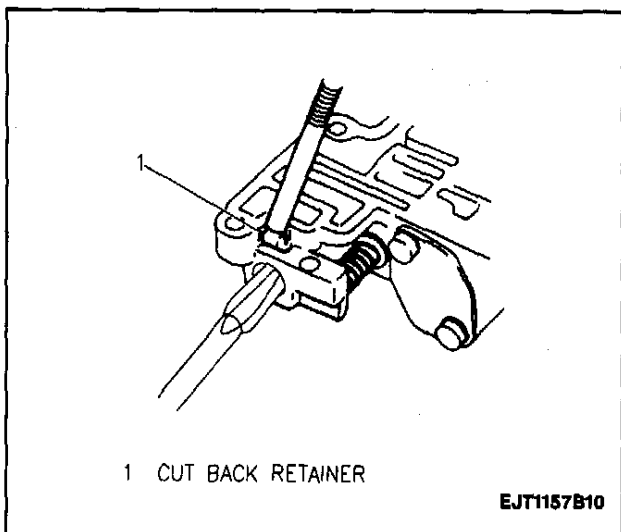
Removing Cut Back Valve (03-72LE, 4-Speed)
